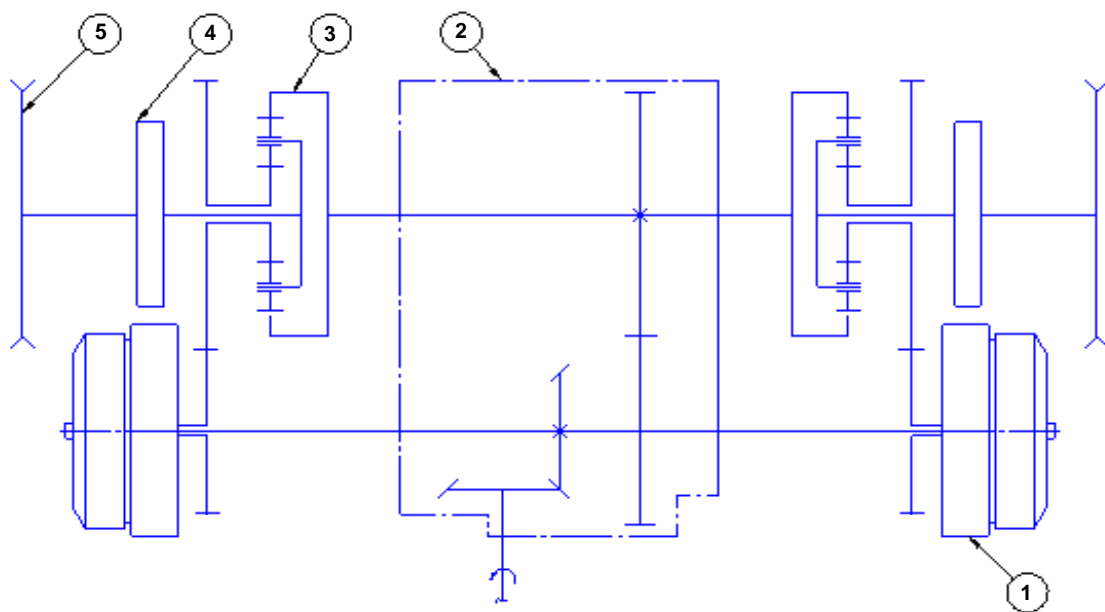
Kinematic scheme of native transmission of the light multipurpose tracked transporter-tractor MTLB: 1 – Turning mechanisms; 2 – Gearbox; 3 – Summation planetary rows; 4 – Final drives; 5 – Driving wheels
